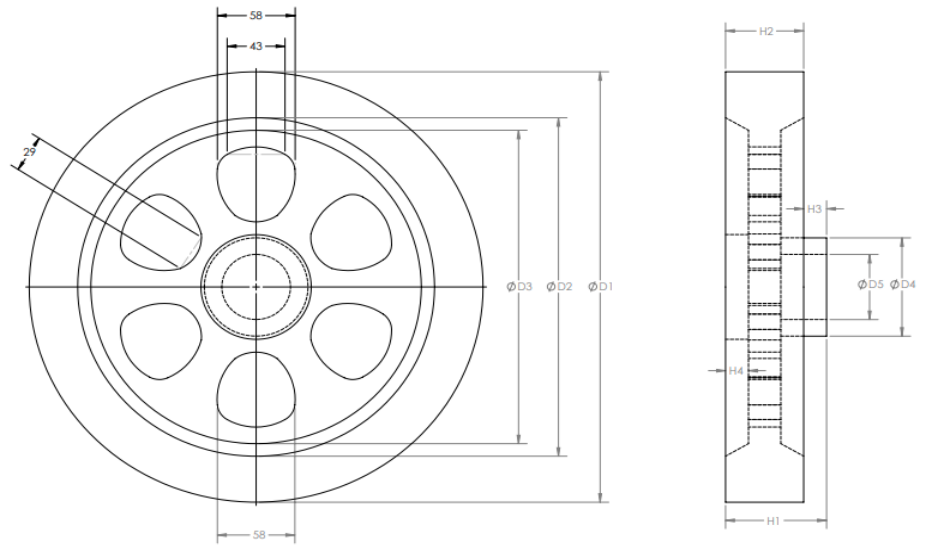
Pulley pattern detail size drawing (Solid Work 2022)
